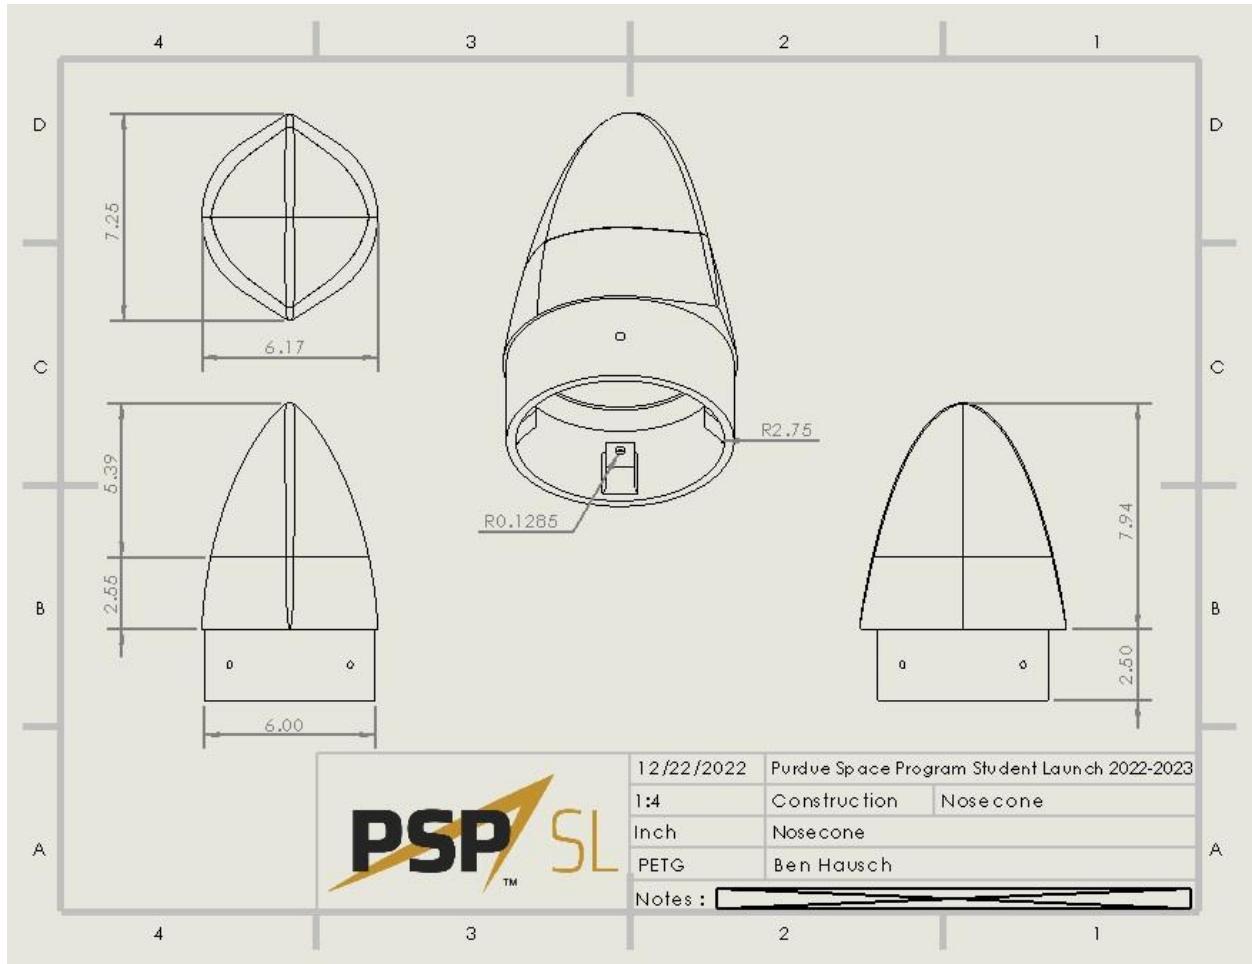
Technical Drawing for nose cone
